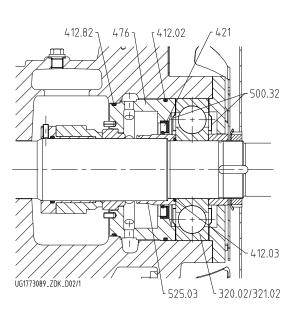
General assembly drawing of HPK-LS/LE/LS4/LE4
